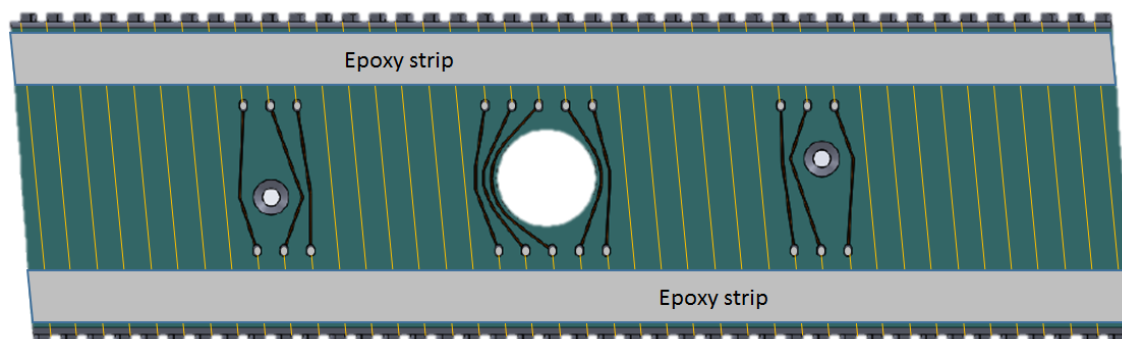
Design of a wire wrapping board for the U wires on a long edge of an APA. The light, angled lines represent the wires wrapped over the board surface. Some wires near the mounting holes must be soldered to the copper traces and then cut. An epoxy strip attaches the wires to the board so the solder is only critical for the electrical connection.
